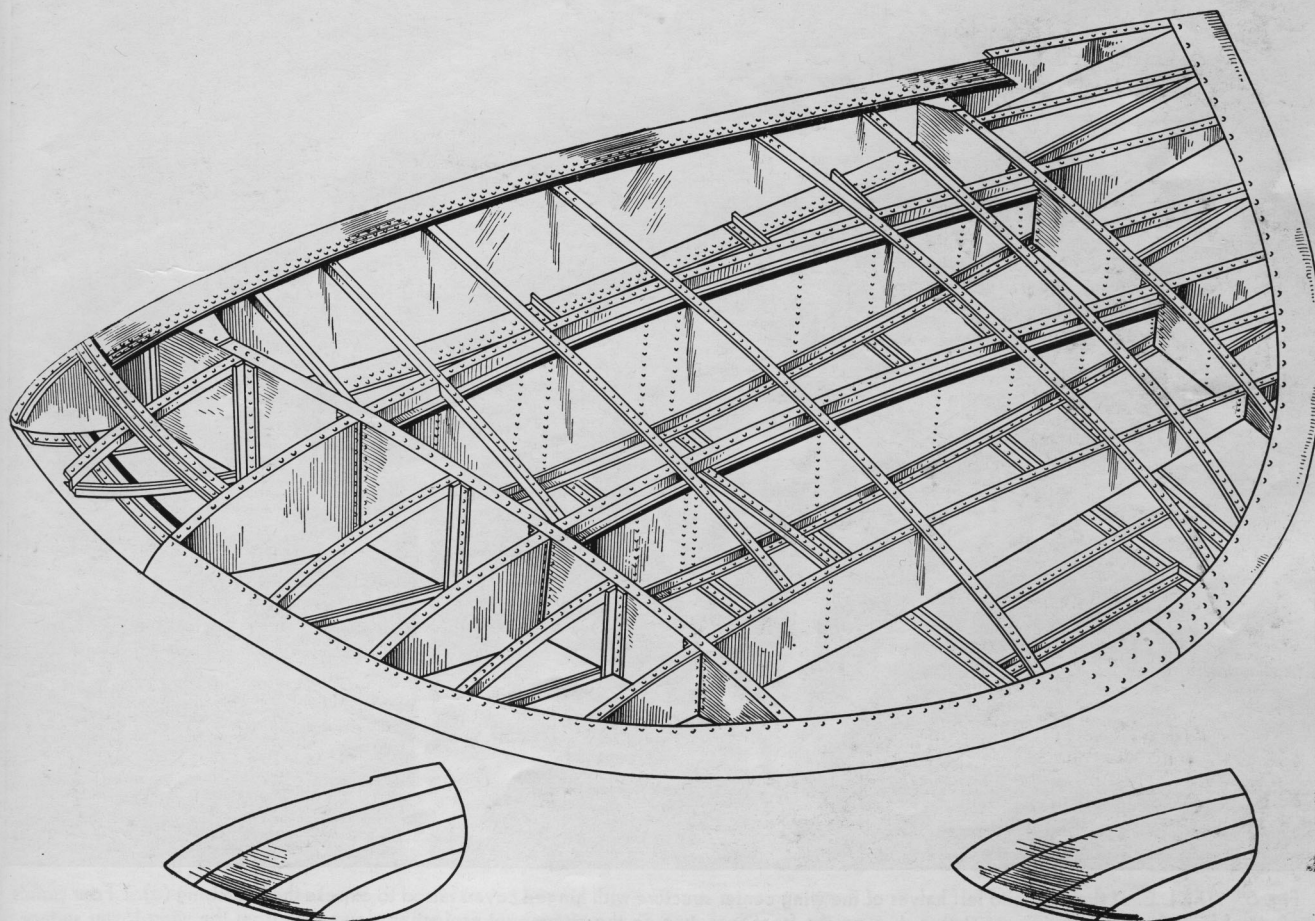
Wing tip structure. Plating on the upper and lower surfaces is shown at the bottom left and right, respectively.
